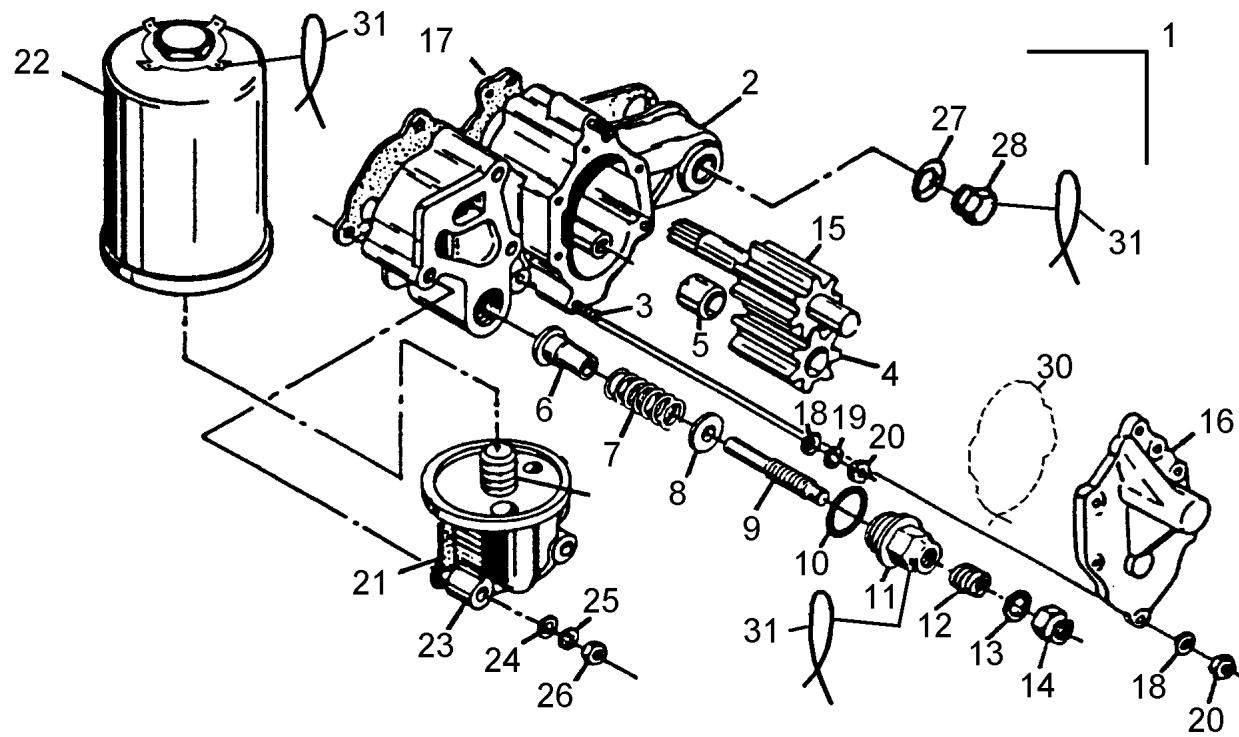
B. OIL PUMP ASSEMBLY FOR I0-550-A4B, A5B, A6B, A7B I0-550-B5F,
